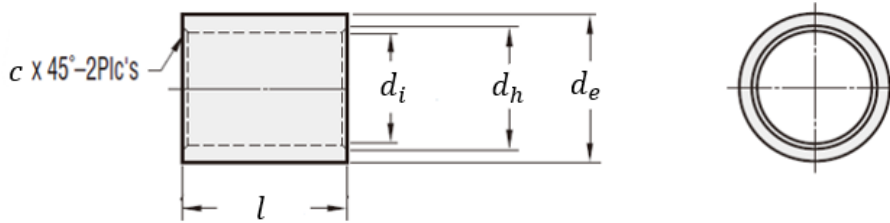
Outer race bearing spacer drawing [42] - *Courtesy of Misumi.
